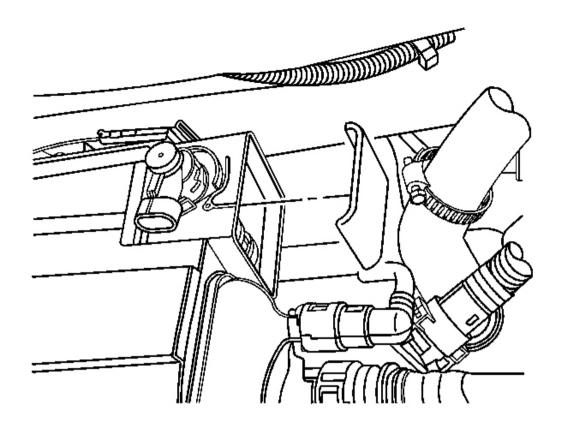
View Of Cover To The Canister Courtesy of GENERAL MOTORS CORP.
